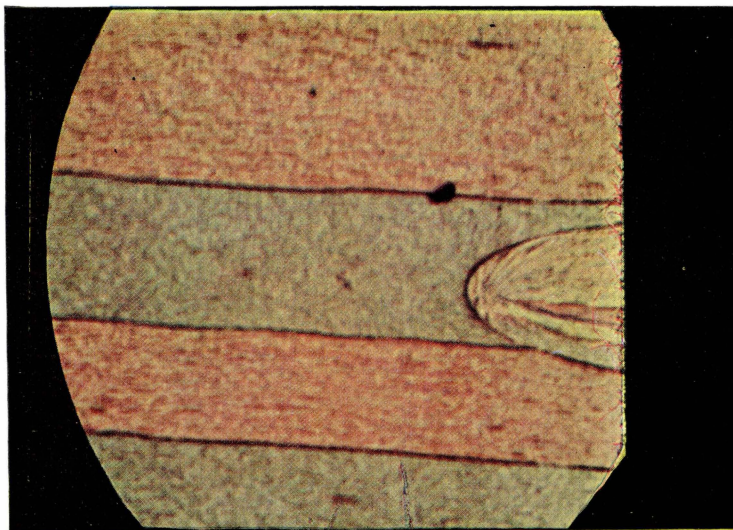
Fracture surface colors produced by thin-film interference.
